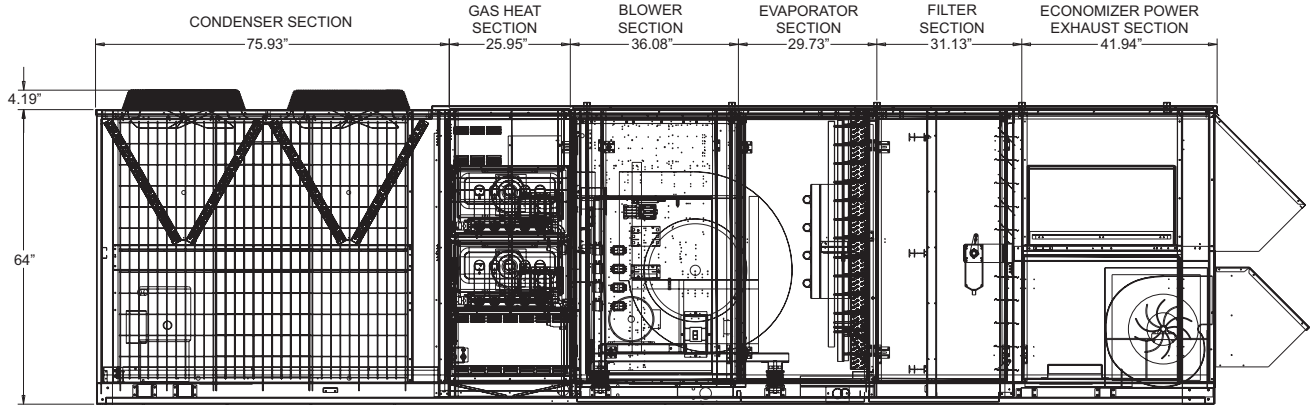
25 AND 30 TON SERIES 40 MAJOR COMPONENT LAYOUT
